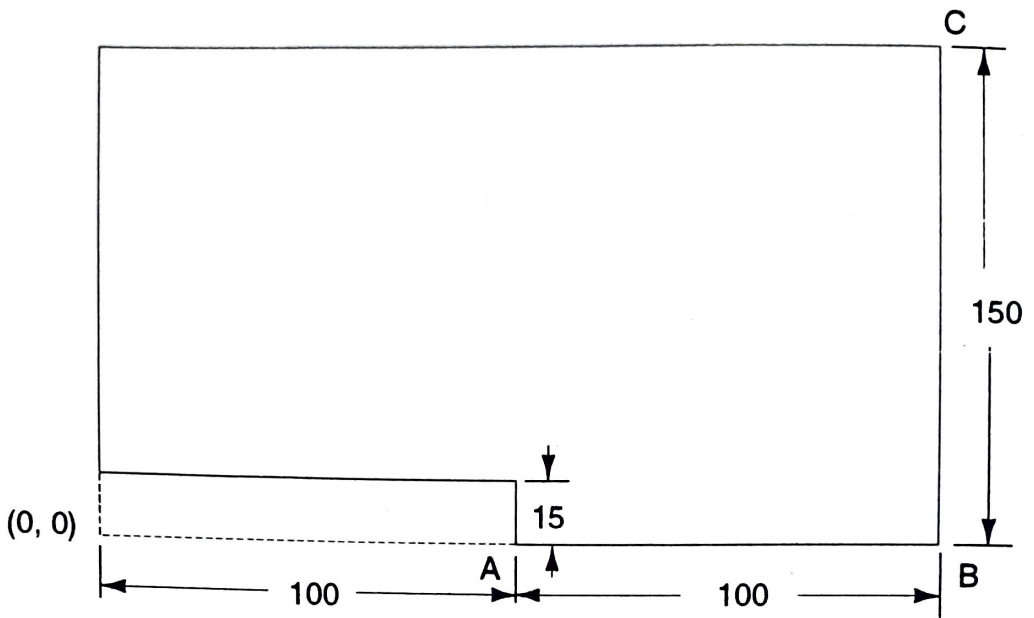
$Z = 0$ is 50 mm above the surface of the workpiece and depth of cut is 5 mm
